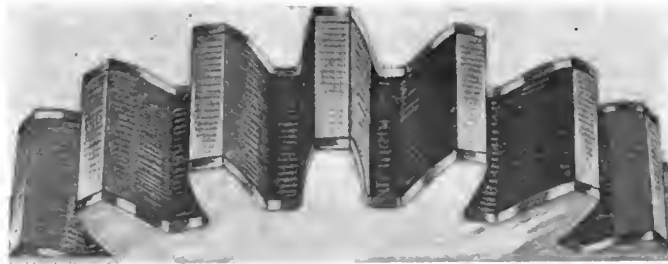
Example of rawhide, shrouded involute teeth gear.
